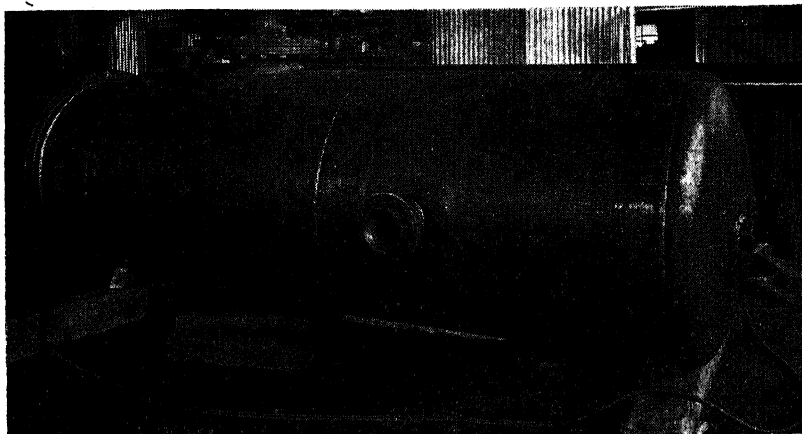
Pressure vessel arc welded according to A.P.I.—A.S.M.E. codes with Type C deep-groove electrodes. Shell thickness $\frac{5}{8}$ -in.
